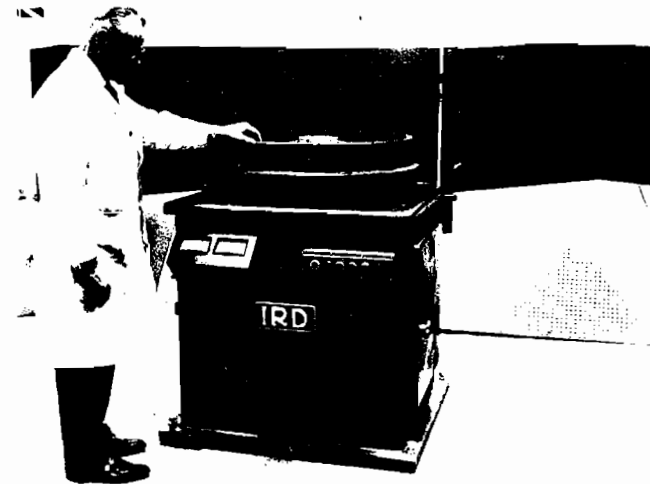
This Vertical Balancing Machine was Designed to Simplify Loading and Unloading Heavy Workpieces.
